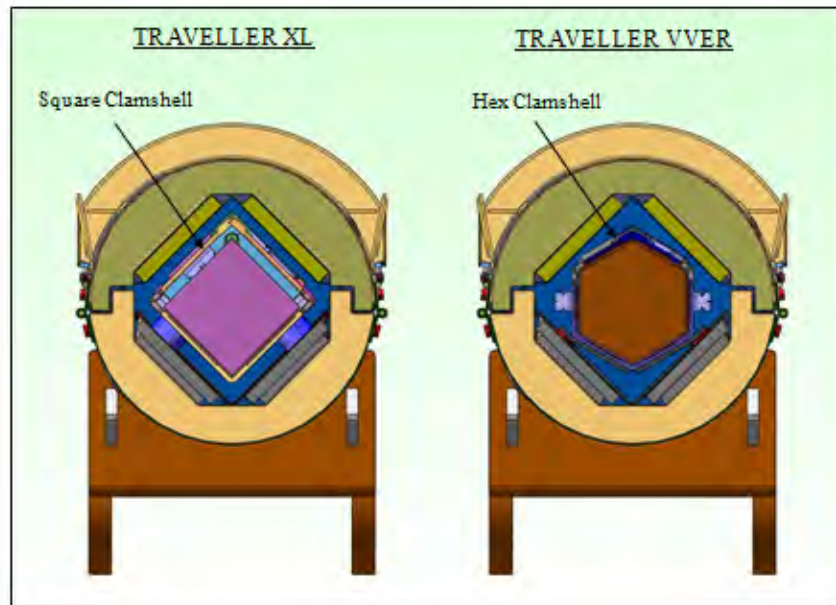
Cross-Section Views of Traveller XL and Traveller VVER Shipping Packages
